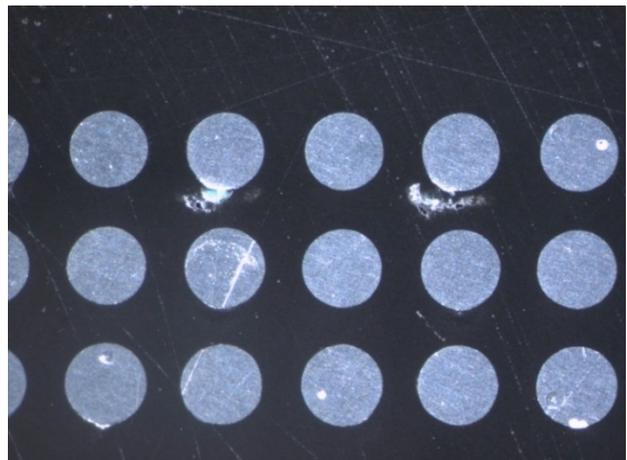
Detailed planar cross-section image for material B – Very minimal voiding
